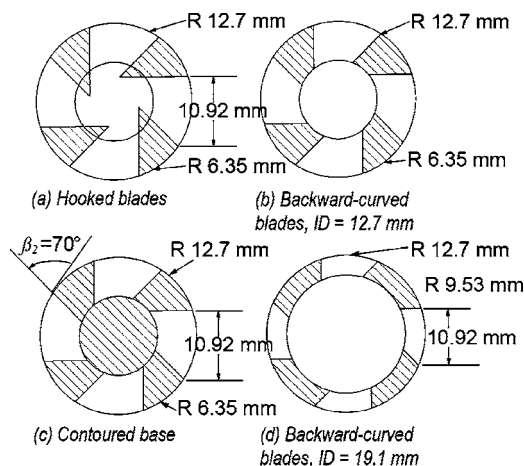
Impeller design cross sections through the centers of the impeller blades
